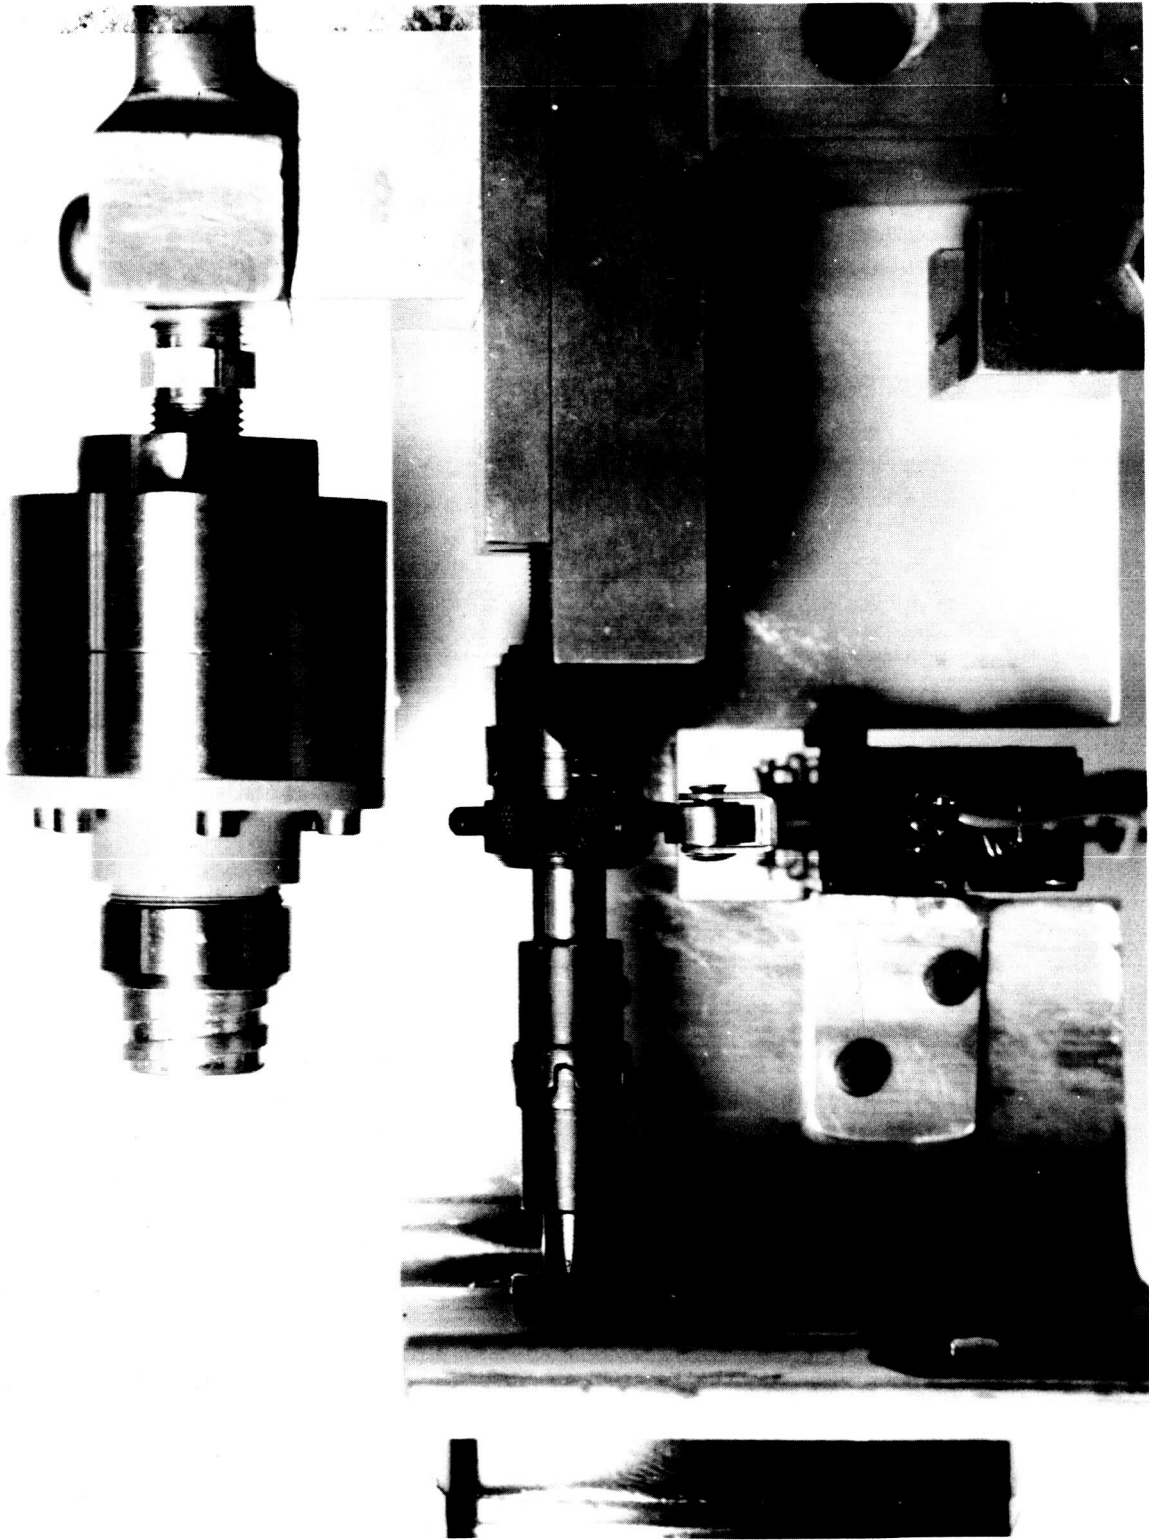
CLOSEUP OF MICROSWITCH FOR GILMAN SLIDE DRIVE ASSEMBLY
